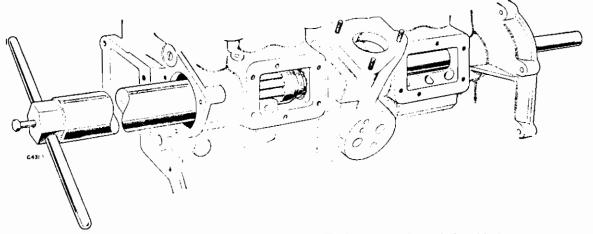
Reamering camshaft bearings (Engine must be in vertical position)
